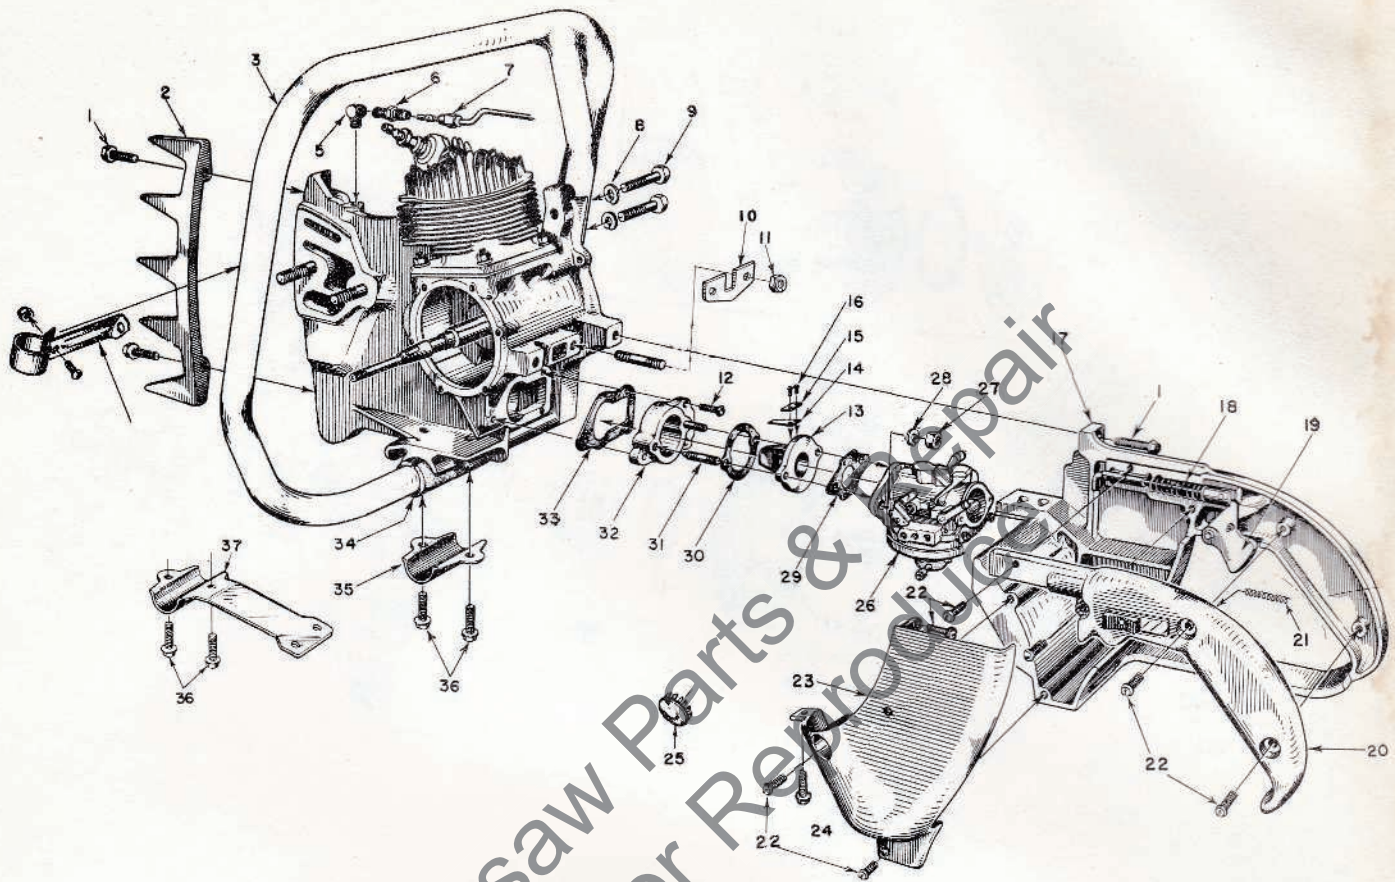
HANDLE, GRIP AND REED VALVE PARTS
